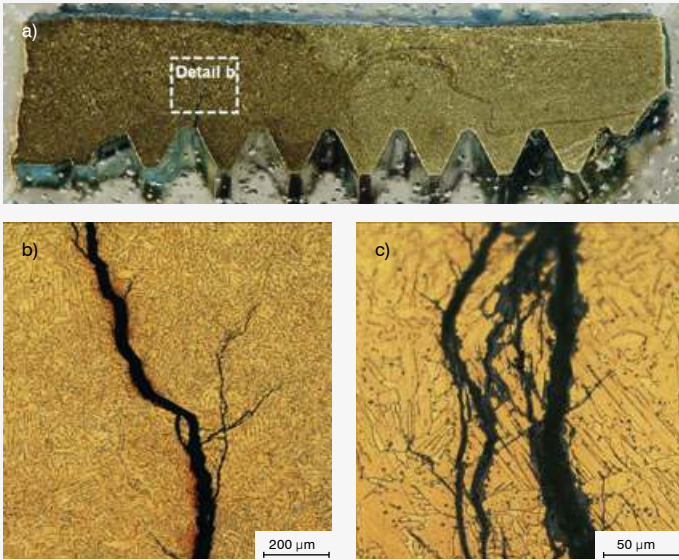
to c: a) Longitudinal microsection of the socket, right-hand side with hemp; b) continuous radial crack on length of thread engagement; c) detail of tensile cracks from b)
